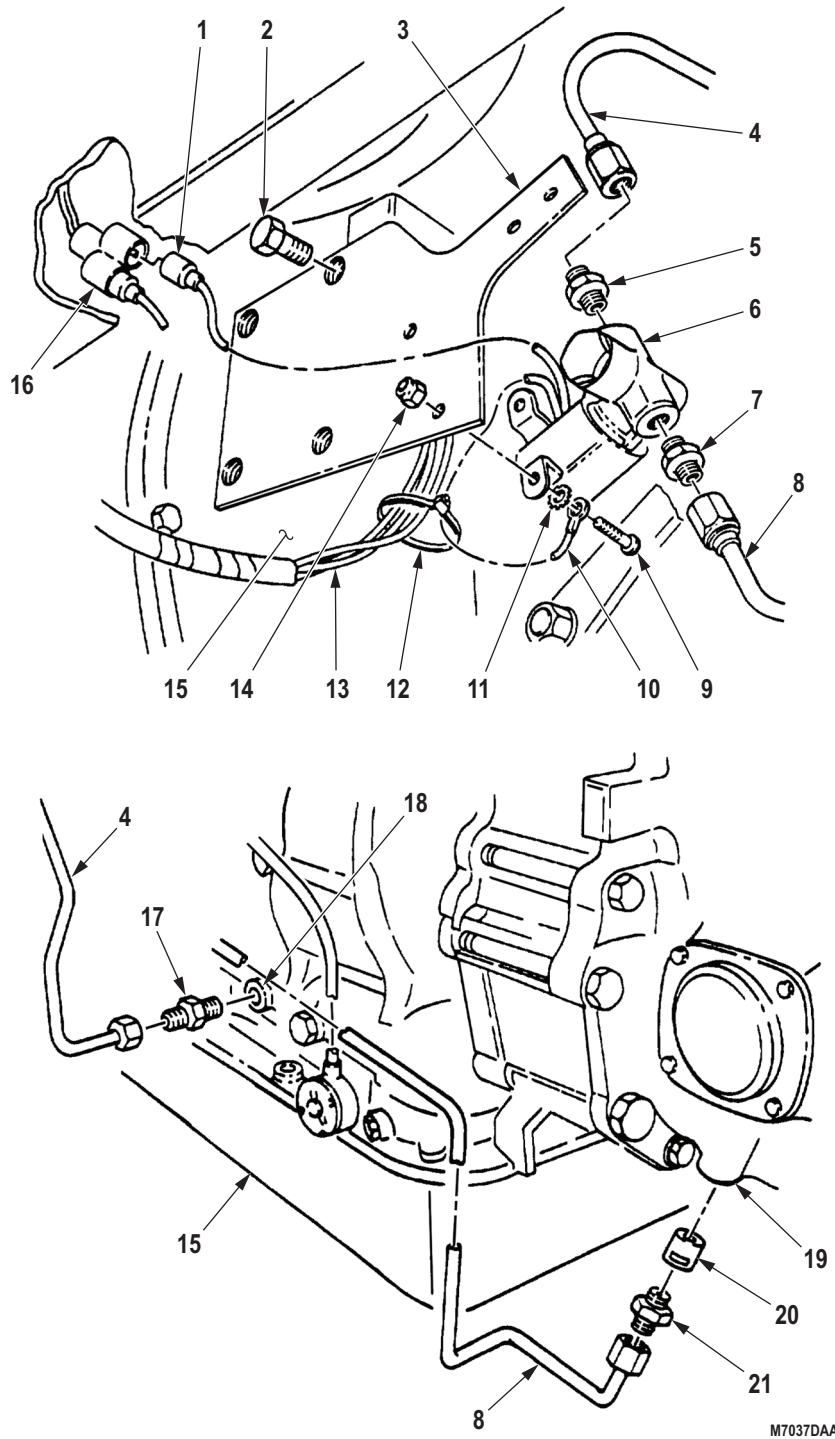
Transmission Fifth Gear Lock-in Solenoid Removal.
